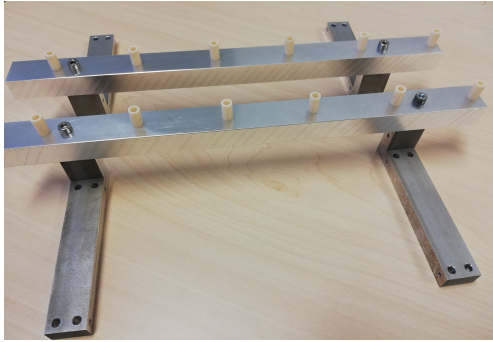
Aluminium construction supporting the PCBs. It consists of 2 parallel beams that are mounted on the chamber floor by means of 4 long feet. 12 ceramic pillars are placed on the beams to heighten the position of the PCBs even more.
